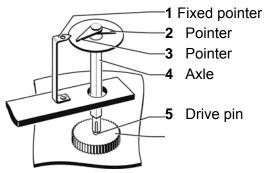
a: Structure of the mechanical position indicator SA
